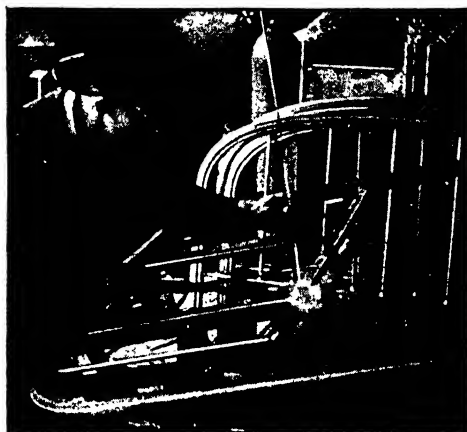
Bronze welding in the manufacture of metal furniture.
